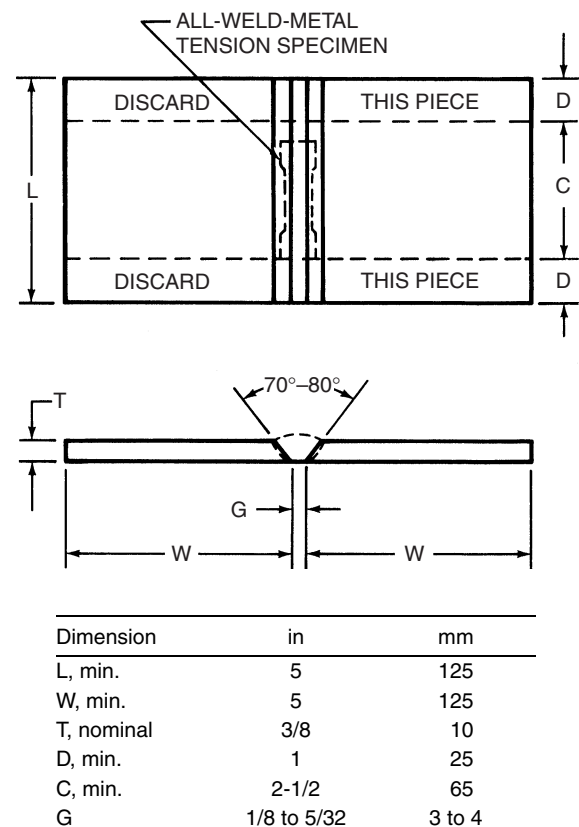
Groove Weld Test Assembly for Mechanical Properties
